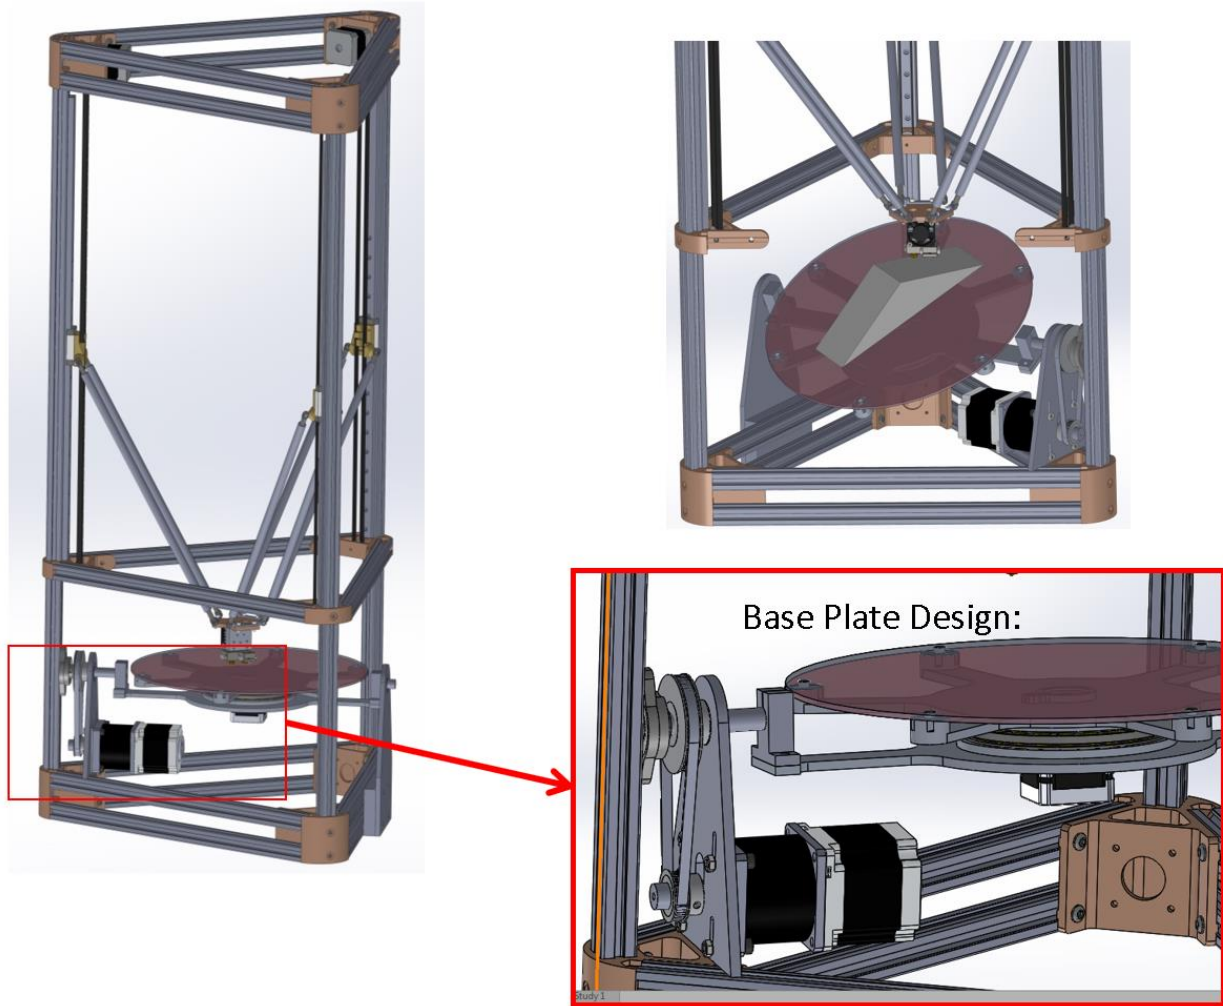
5-axis 3D printer design showing the function of the two-dimensional build platform
